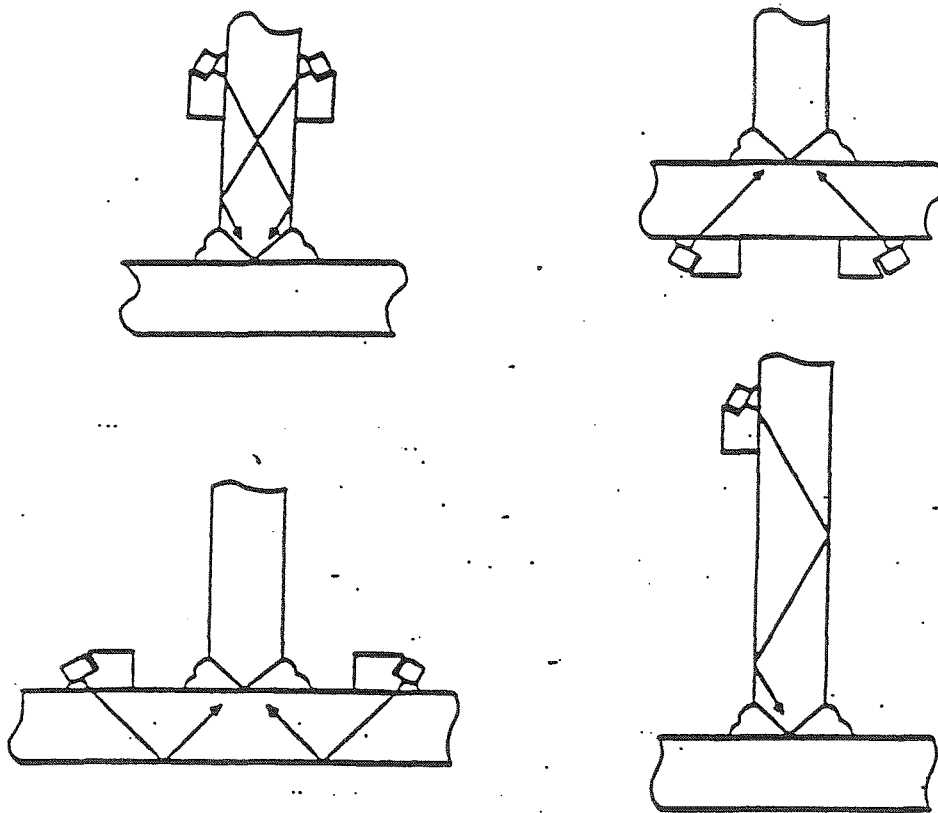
A - Accepted scanning techniques for tee welds.
